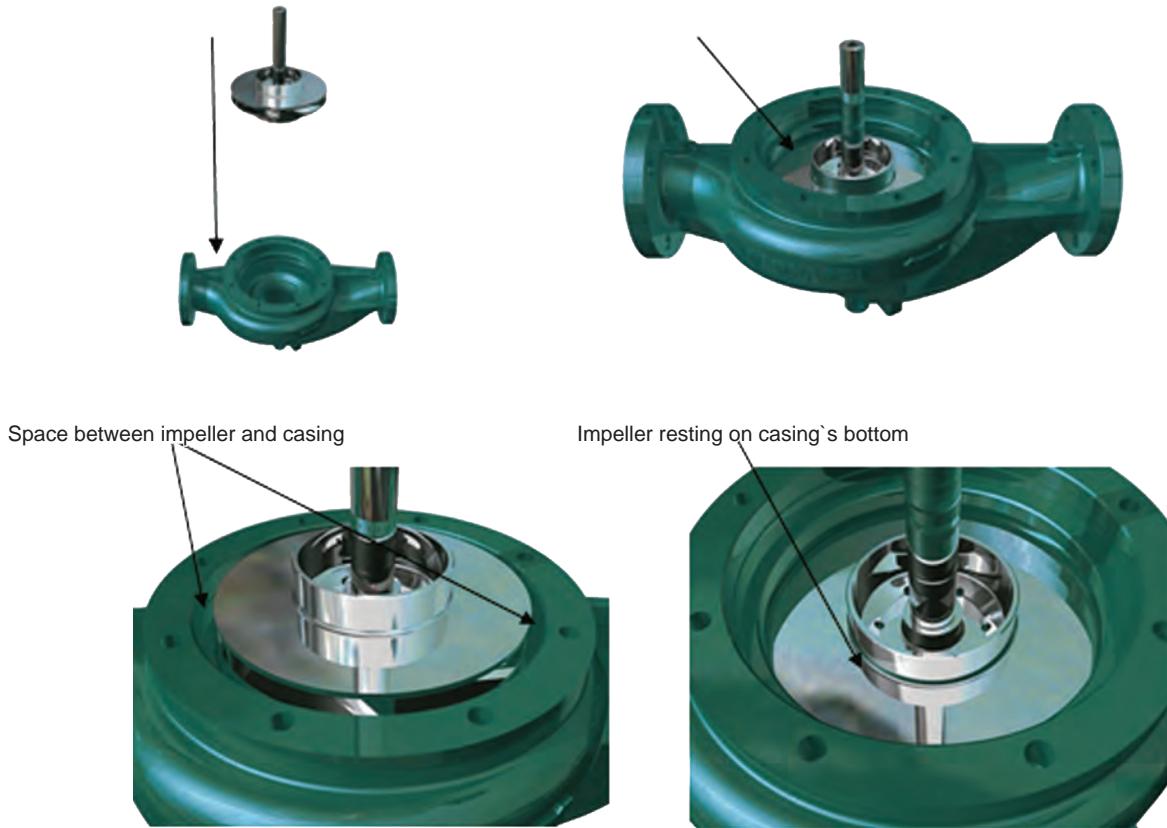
Placing the impeller-shaft assembly in the casing.
